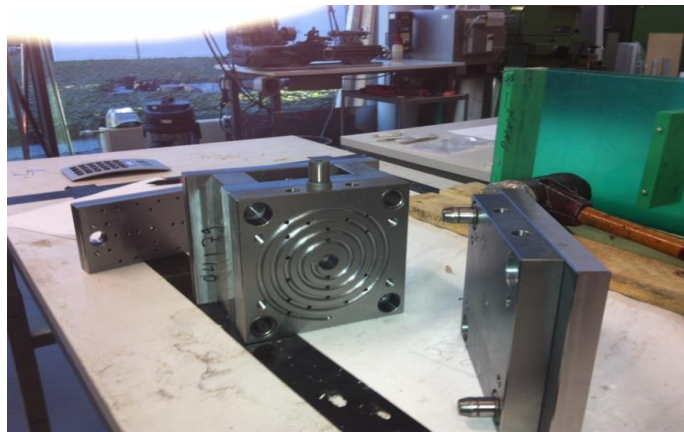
Screenshot of spiral flow testing mould set (exploded)
